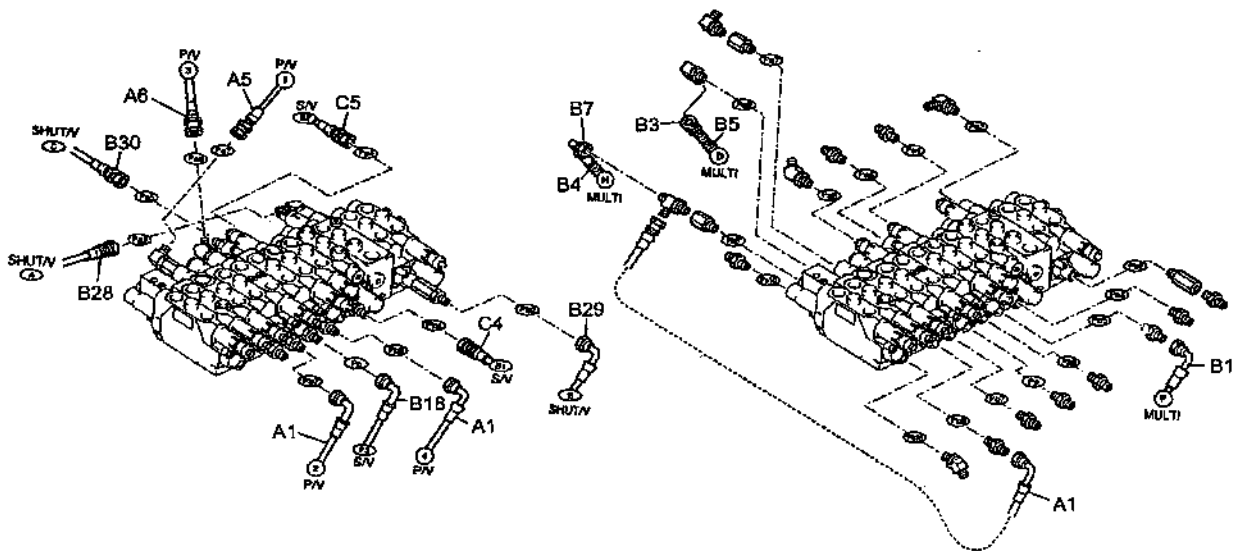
B Pilot hydraulic hose disconnection [USA]
